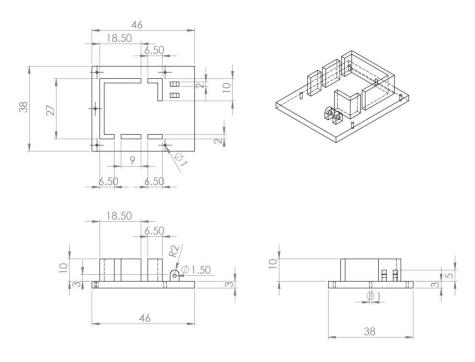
Motor Housing Figure 7 shows the detailed 2D draft of the motor housing design with dimensions in millimeters.
